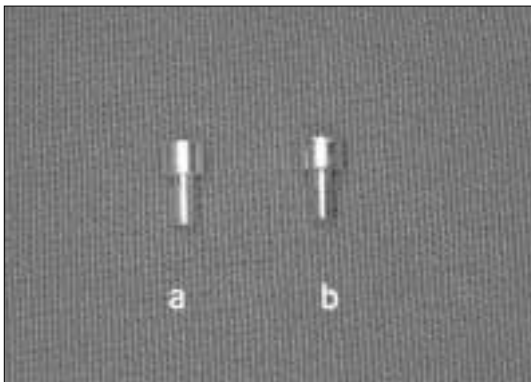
The 3i gold retaining screws selected for this study. (a:new, unused screw, b:old, used screw)
